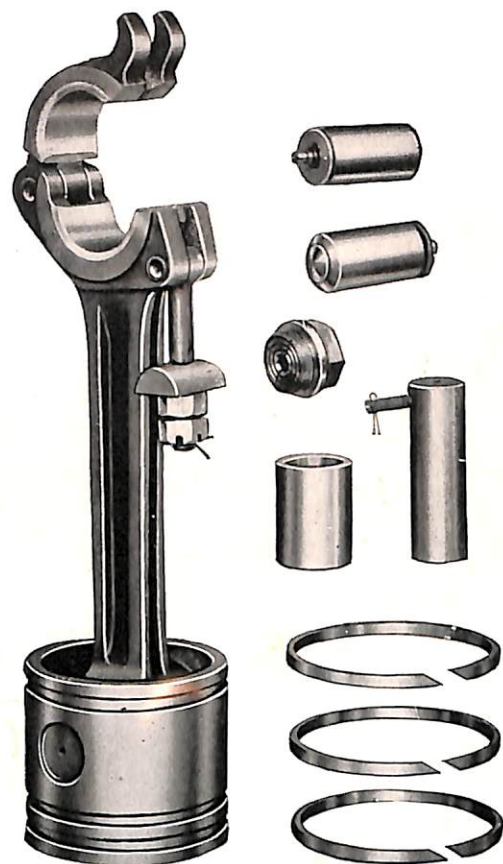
Piston, Piston Rings, Valves, Connecting Rods, for CP-27 Air Compressor
